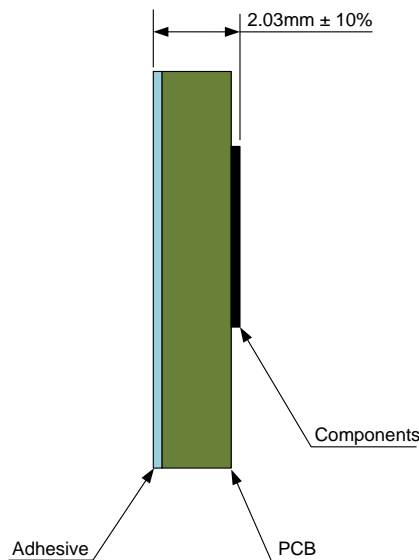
Stack-Up (A) - Thickness. PCB + 3M Double Sided Adhesive.
